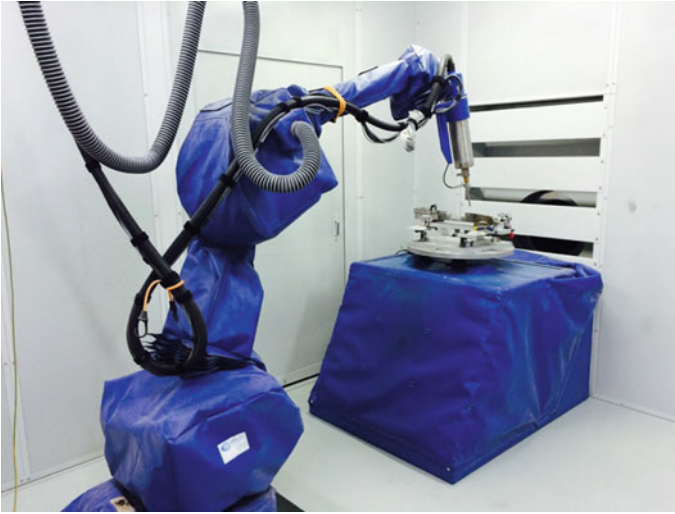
Cold spray gun mounted on a multi-axis manipulator with the substrate or part mounted on a two-axis manipulator. Courtesy of Able Engineering
